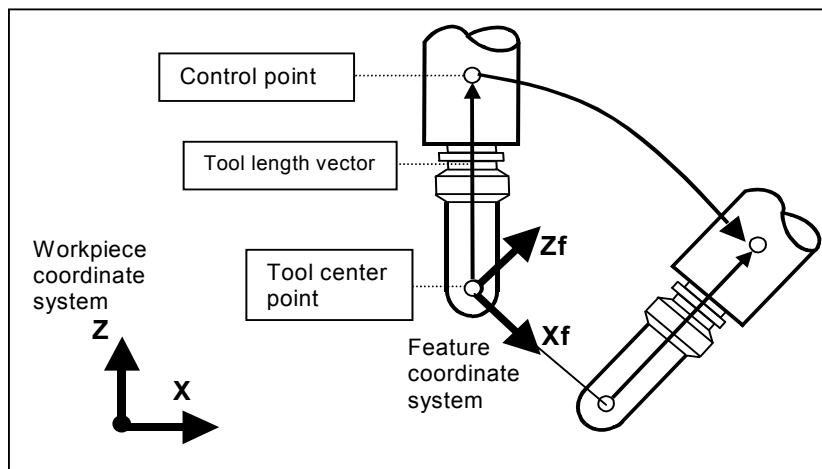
(c) Operation of tool center point retention type tool axis direction control specified with end point of tool center point (tool rotation type)
